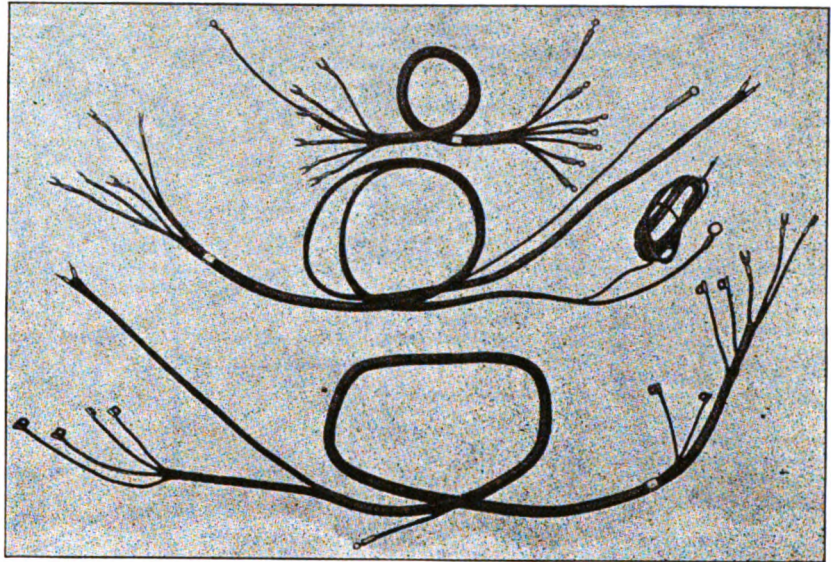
THE NEW CABLE LOOMS CARRY NO. 16 GAUGE WIRES AND ARE HEAVILY INSULATED
